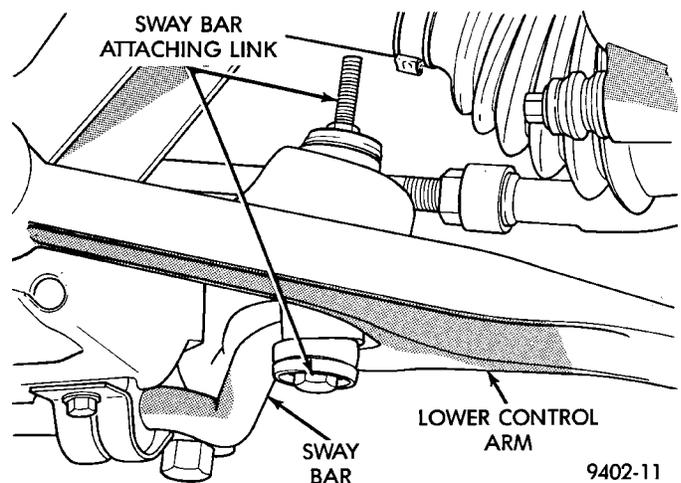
Stabilizer Bar Link To Lower Control Arm Attachment
